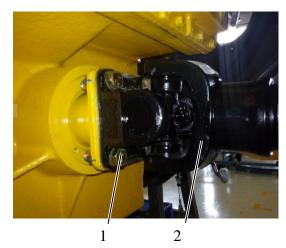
1 Rear transmission shaft 2 Hexagon bolt
